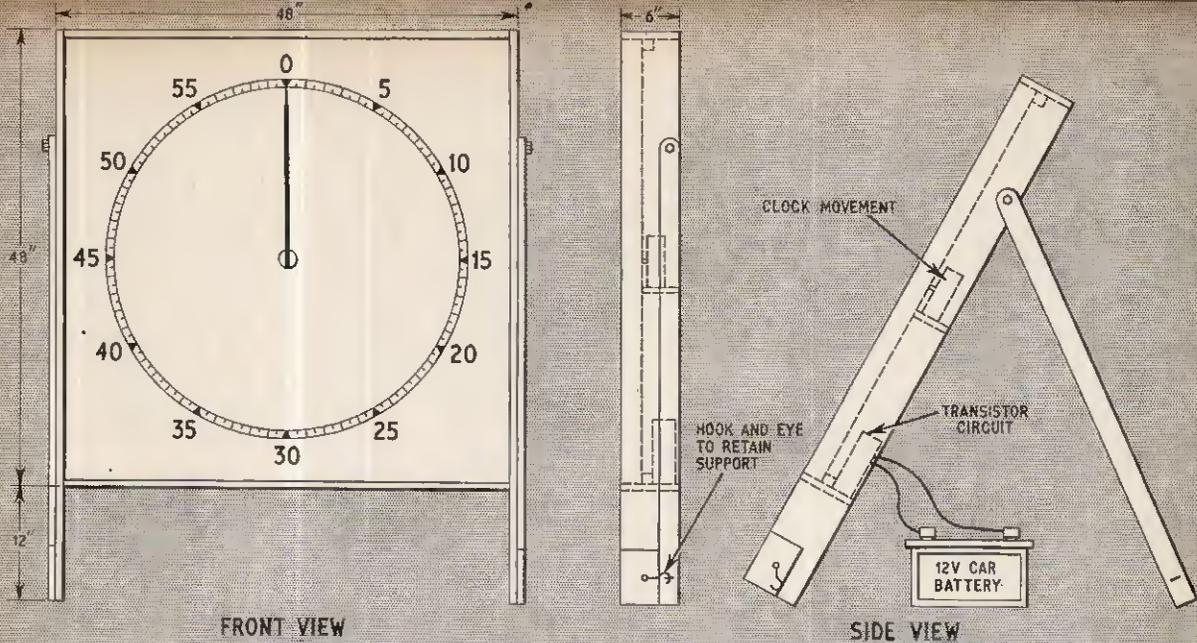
Front and side view of the complete clock showing the overall dimensions
